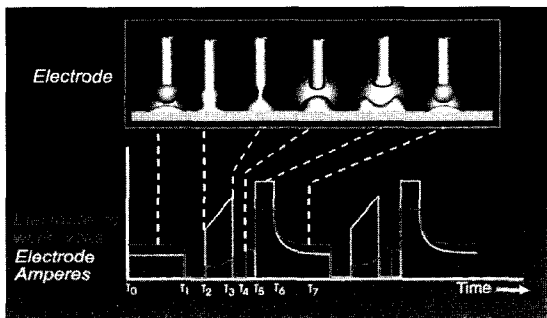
A sample of welding current waveform of welding power source controlled by current waveform - STT³⁾
